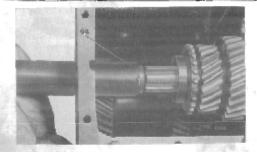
Using Churchill tool S.145 to install the mainshaft circlip
